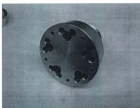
Part with drive rod, ball element clearance slot and fastener holes.
